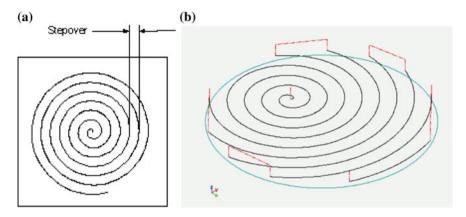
a Step over in spiral tool path, b mixed mode [23]
